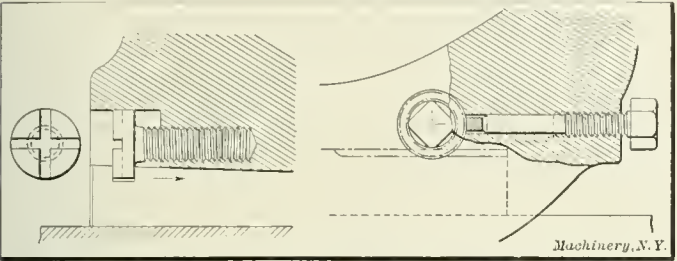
Detailed View of the Adjusting Arrangement shown to the Left in Fig. 40. Fig. 42. An Unusual Arrangement: Taper Strip Adjusted by Rack and Pinion
